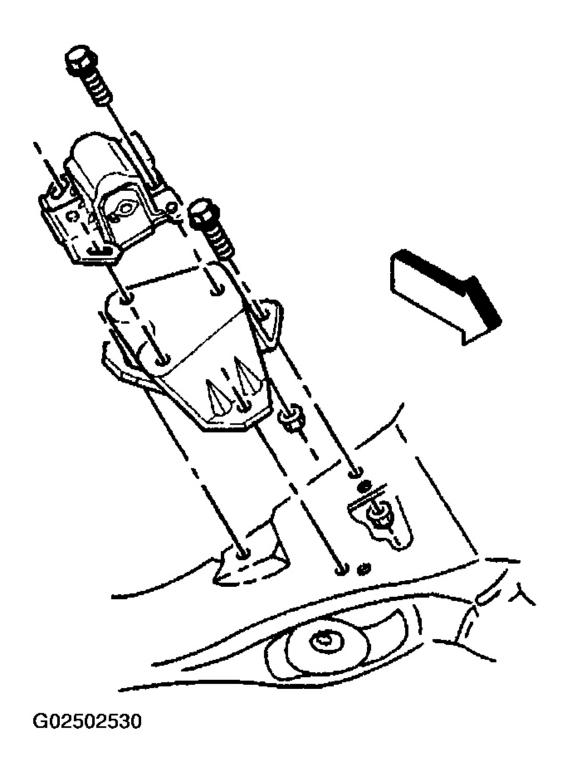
Removing Engine Mount (AWD Vehicle - Left Side Shown) Courtesy of GENERAL MOTORS CORP.
